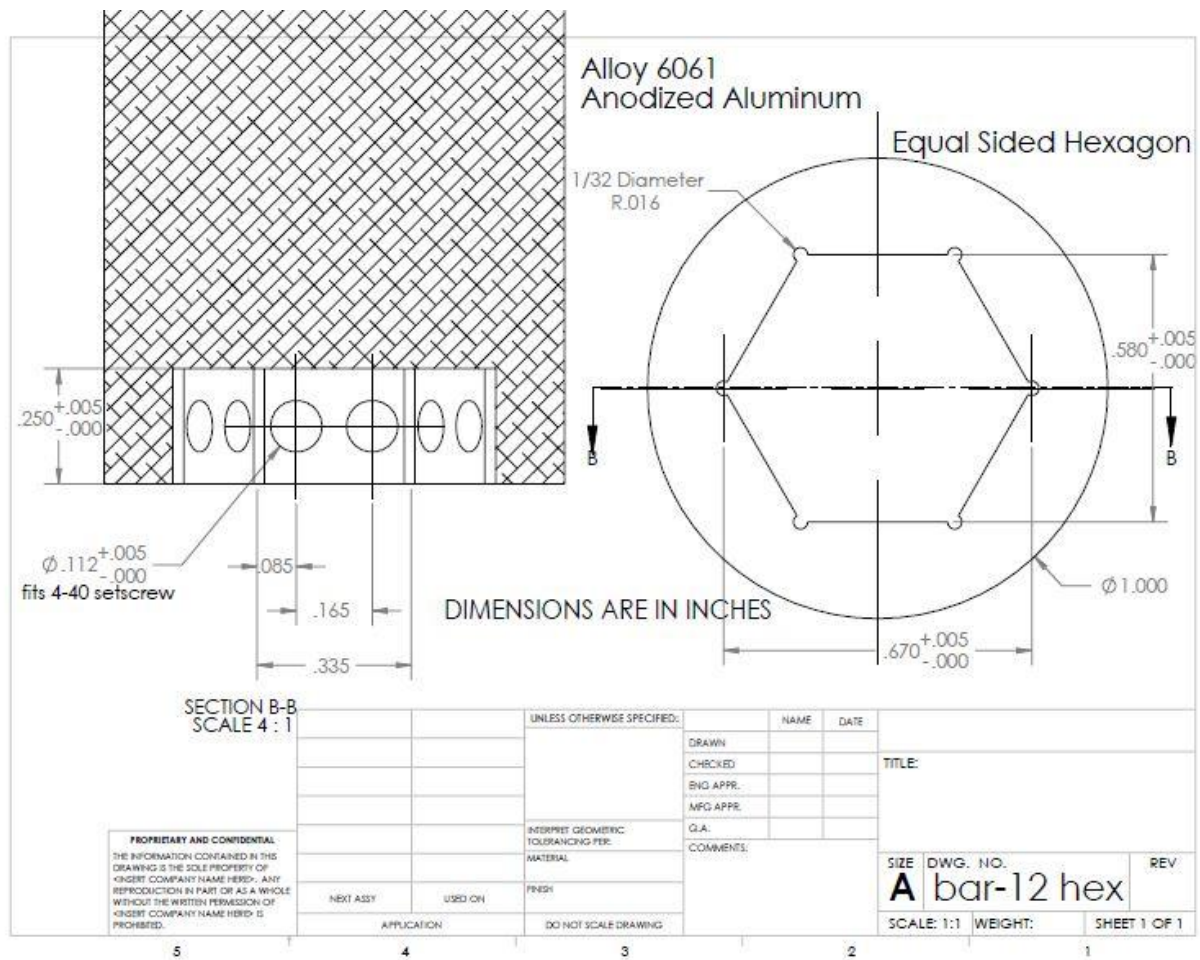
Hexagonal Socket Dimensions with 12 hole configuration
